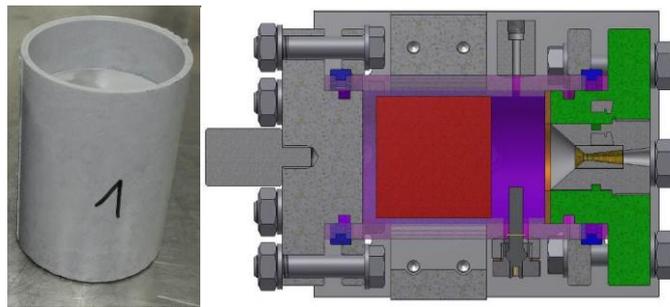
Grain with insulation and axial cross section of the combustion chamber with the nozzle pointing to the right.
